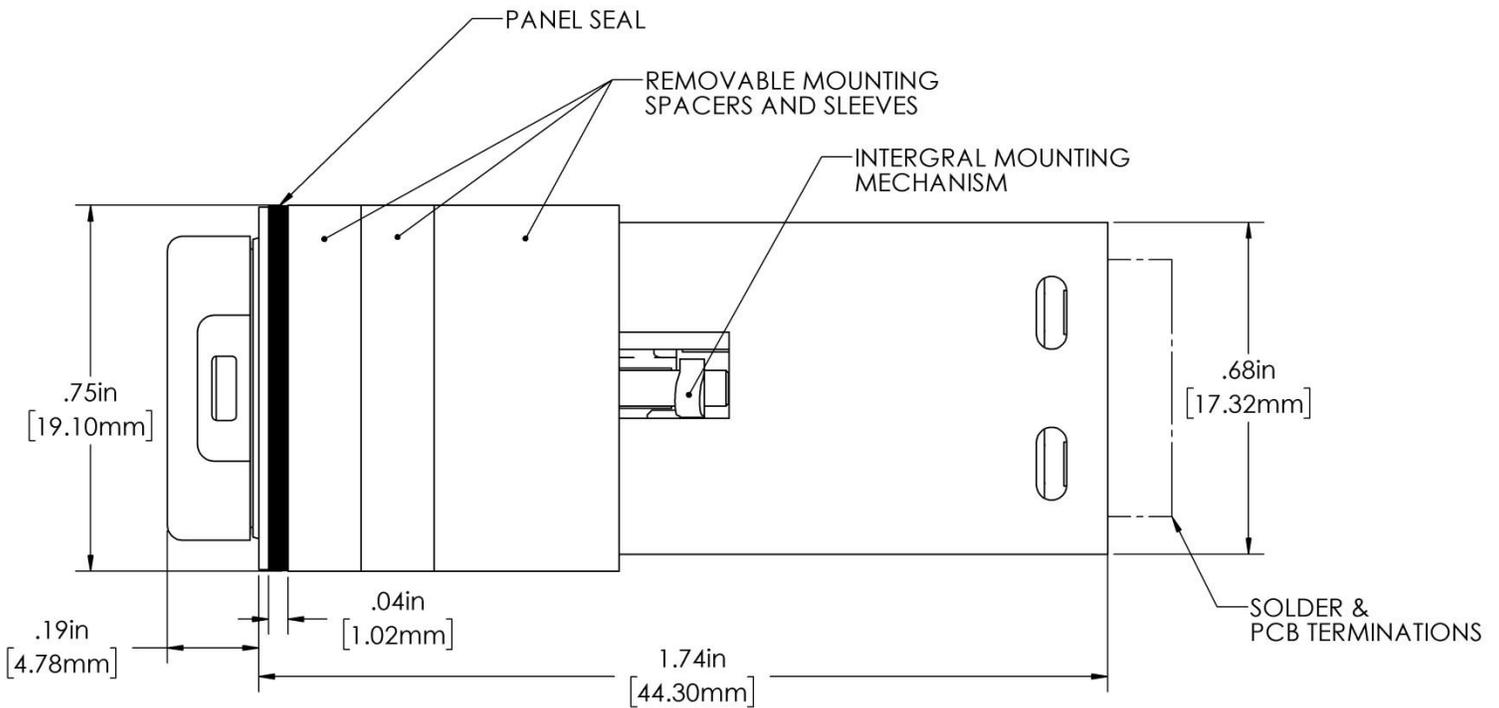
Drip-Proof – Solder/PCB switches – Enclosure Type II solder and PCB termination (side view)
